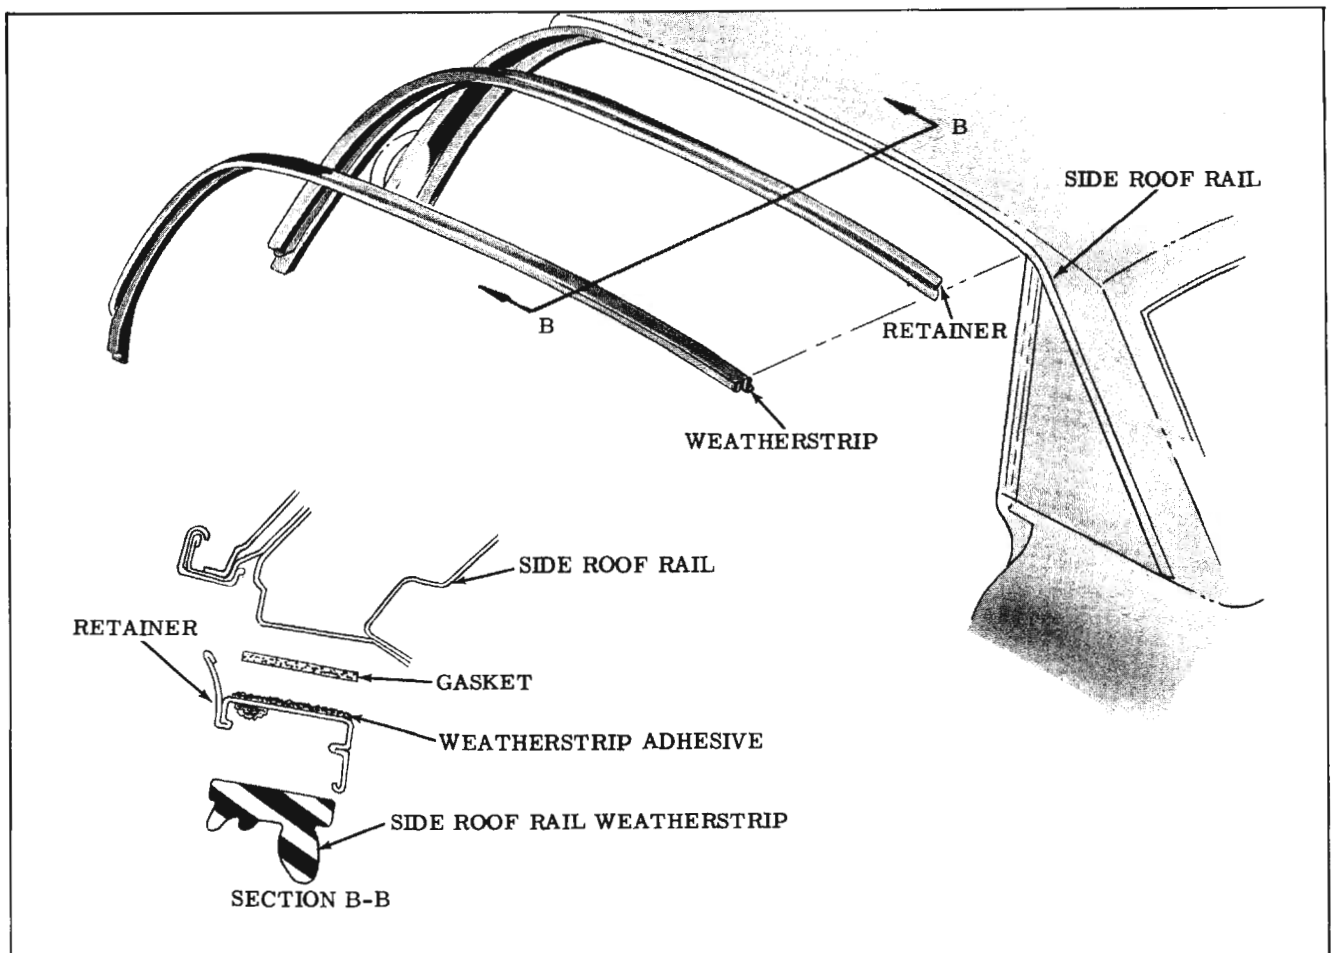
Side Roof Weatherstrip Assembly ("29" Style)
